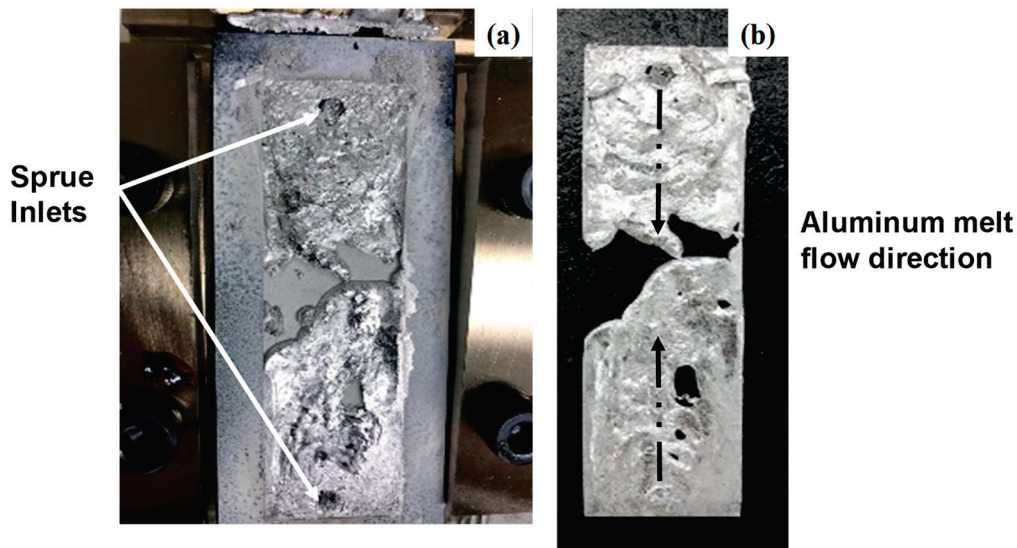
A short-shot experiment by using the double PIG-nozzle units for PIG die-casting. (a) Aluminum melt flow into the rectangular die cavity, (b) solidified aluminum melts.
